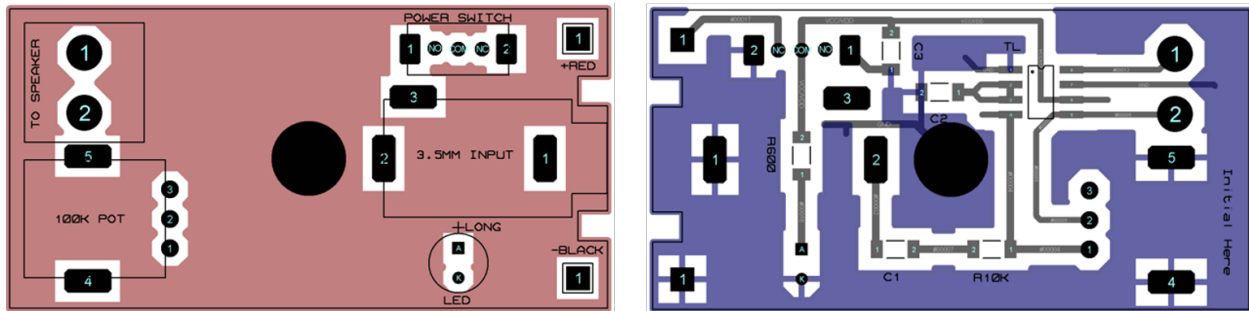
Amplifier PCB layout (left=top, right=bottom)
